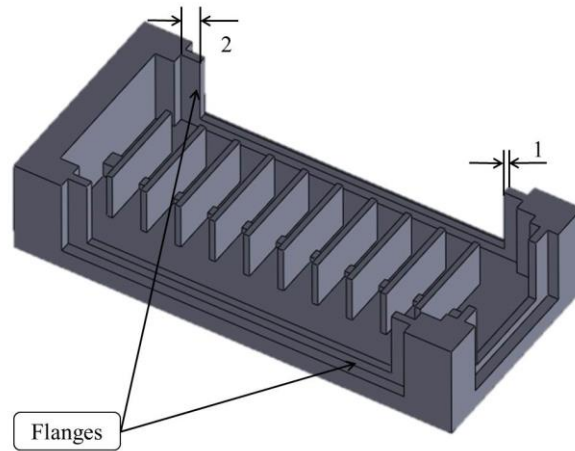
Main Piece of Mold V3b for Extension Mechanism V3
